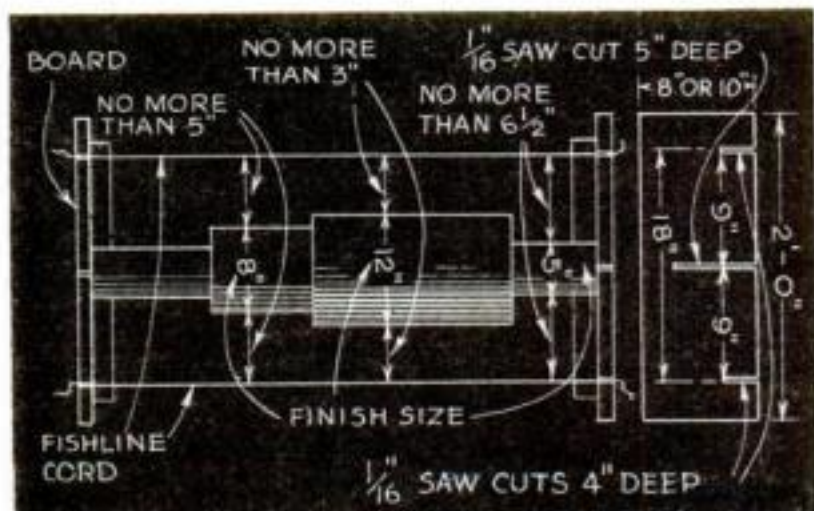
Diagrammatic sketch showing how two slotted boards and some fishline can be used to line up a crooked shaft.
